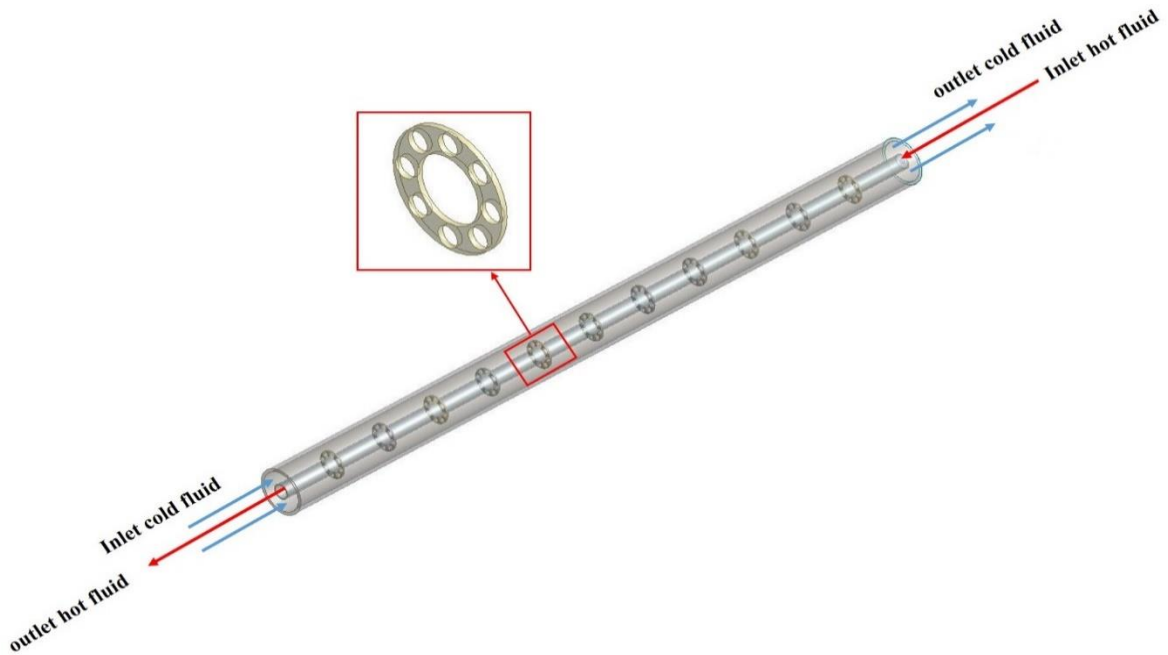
3D model of double tube heat exchanger with PCR inserts.
